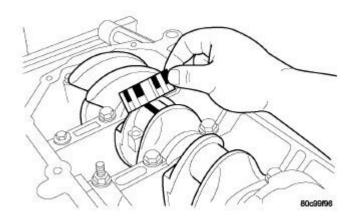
Measuring Connecting Rod Bearing Clearance Using Plastigage
